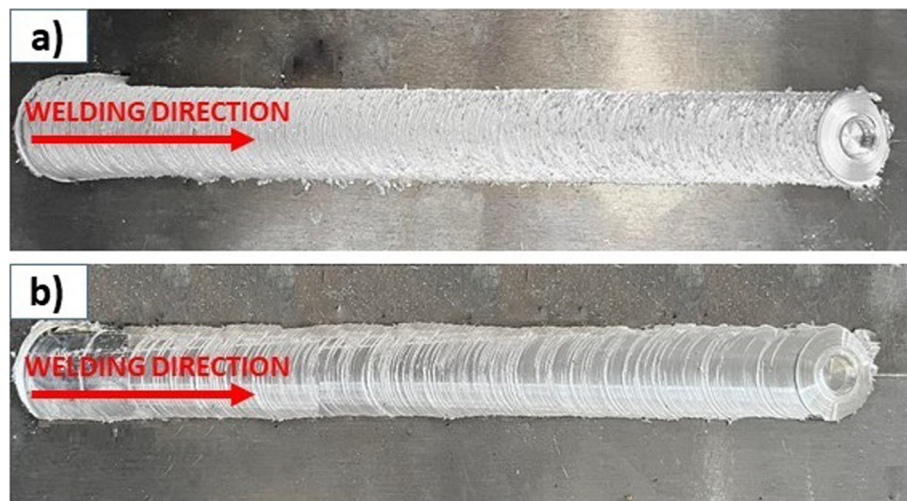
Friction stir welded samples produced with the tapered cylindrical pin (a) and the hexagonal pin with grooves (b)
